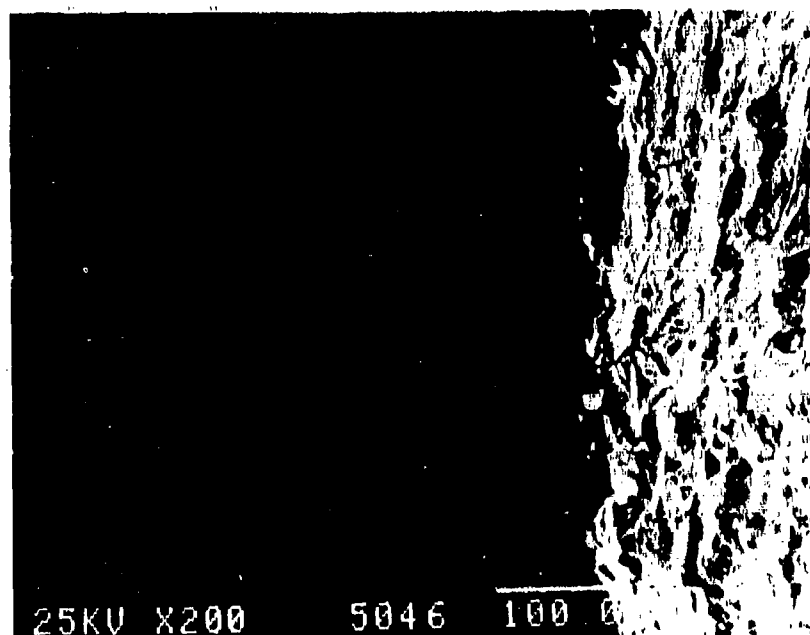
Oblique Fractograph of Specimen 17A; Left Side of Picture (Dark Surface) Is the Stripped Surface; Right Side (Light Surface) Is the Fracture Face. Note the fracture initiated on the stripped surface and the silica particle embedded in the initiation site. MAG: 200X
